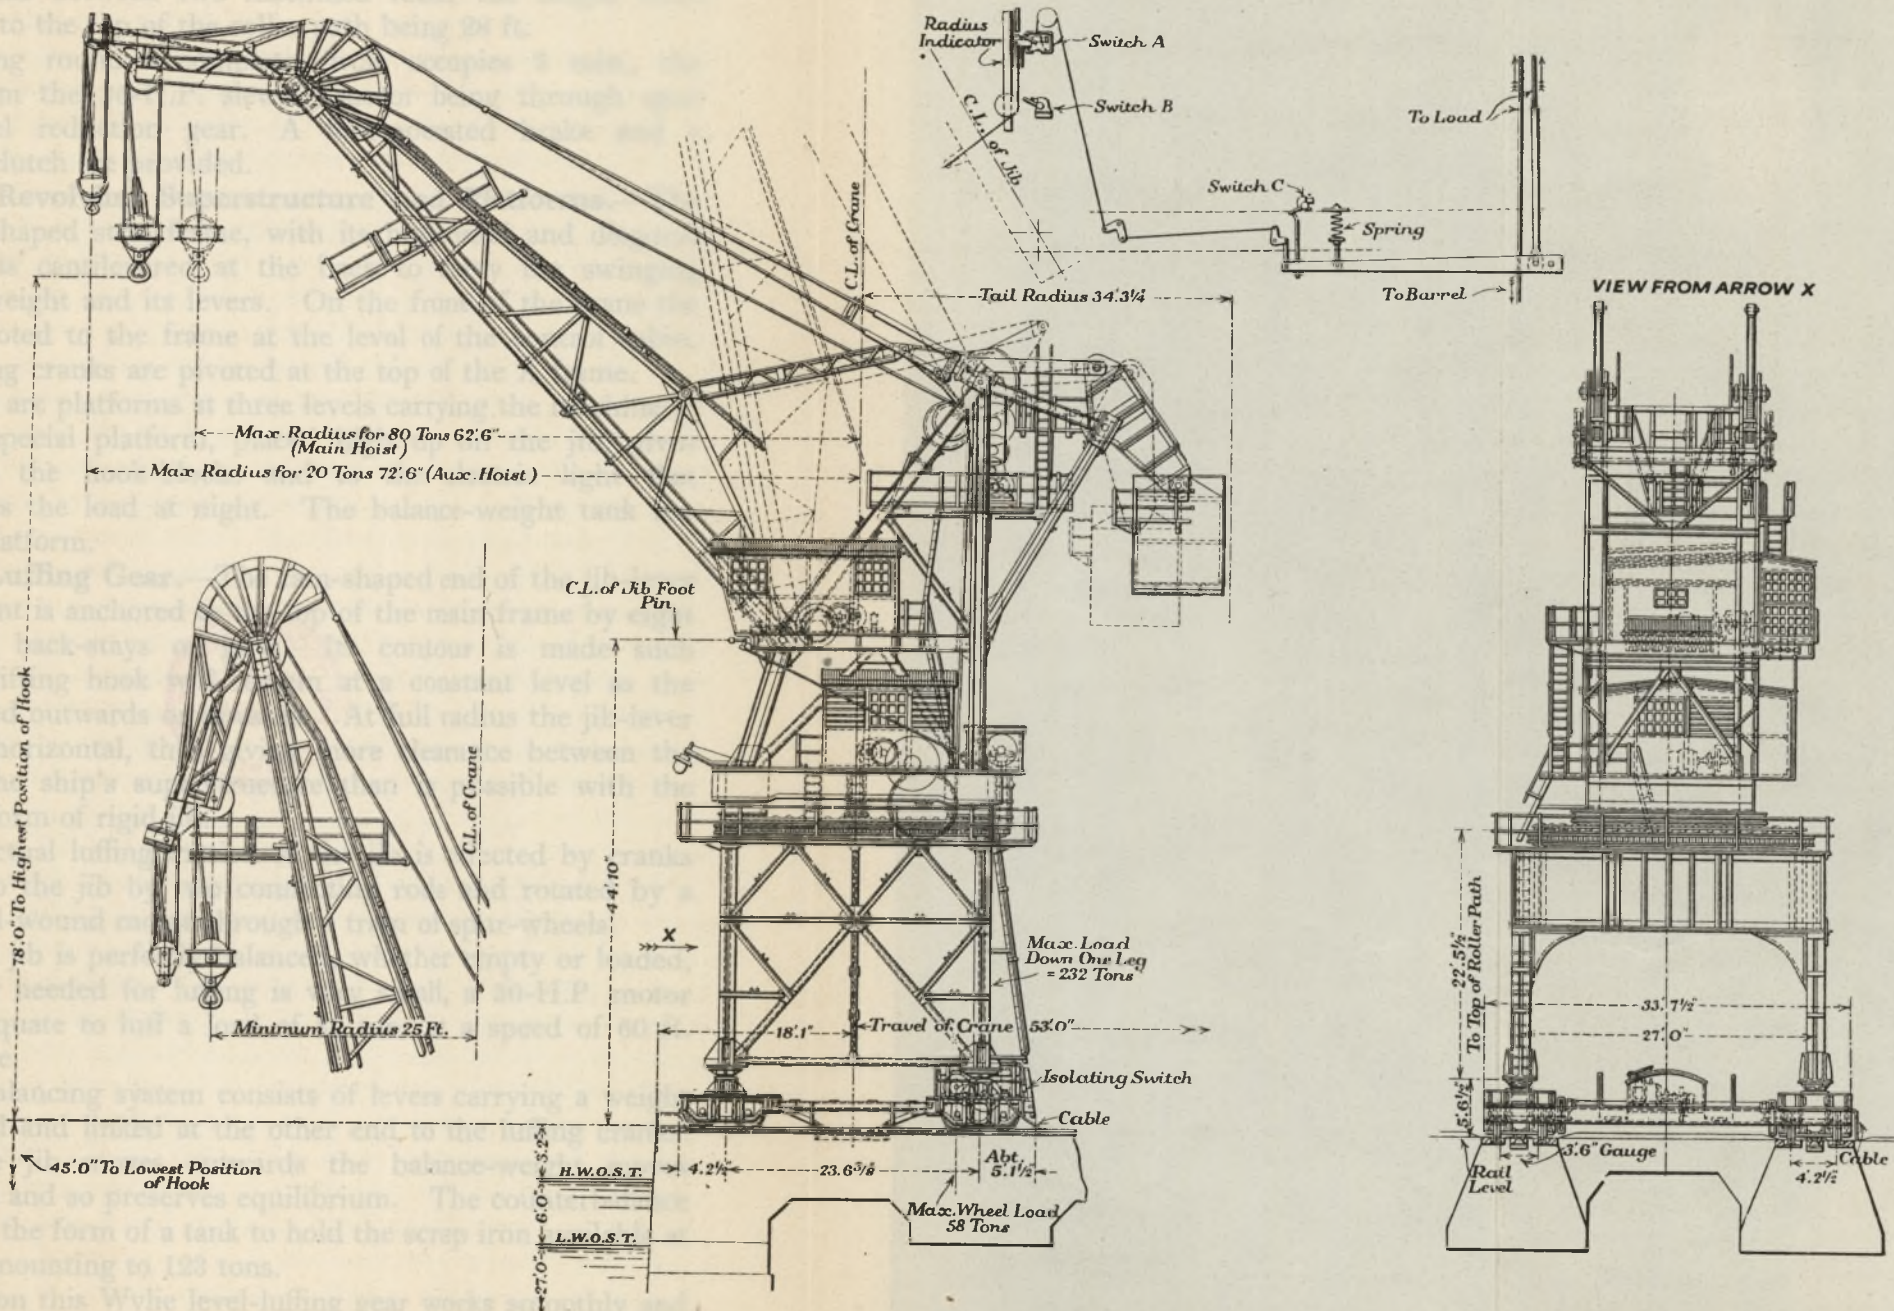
General Drawing of 80-ton Electric Wharf Crane.
